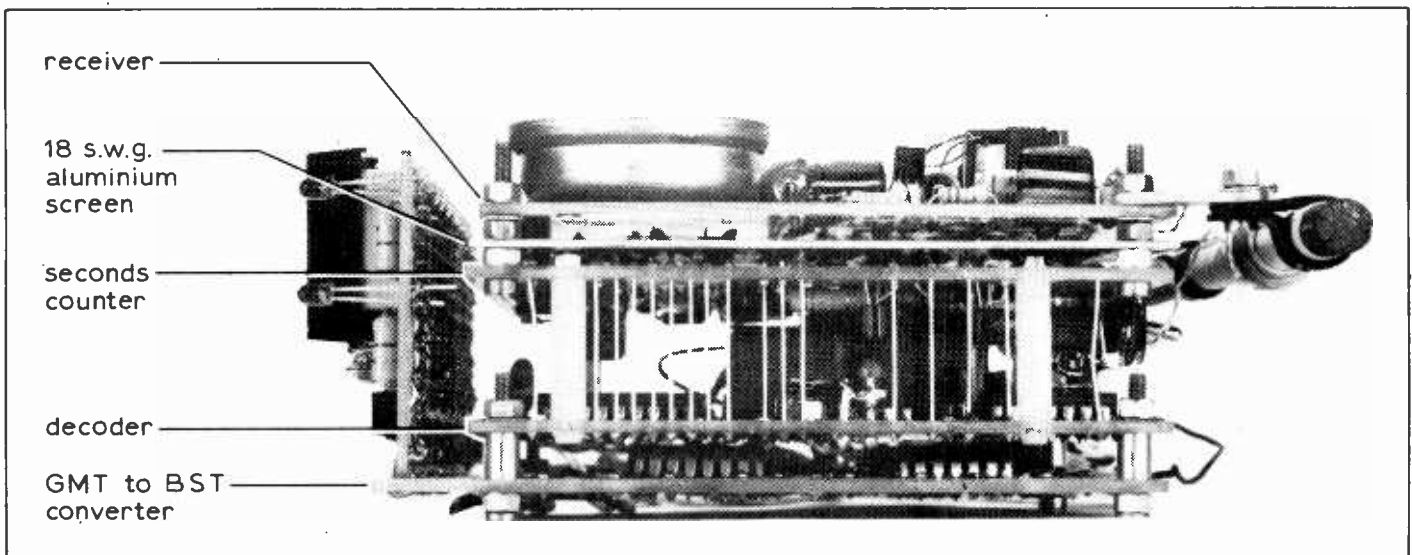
Side view of board assembly. An aluminium screen separates the receiver and seconds counter. The last mentioned and the remaining three boards are all connected via links along edges of the boards. These form hinges so the assembly can be opened out for access.
